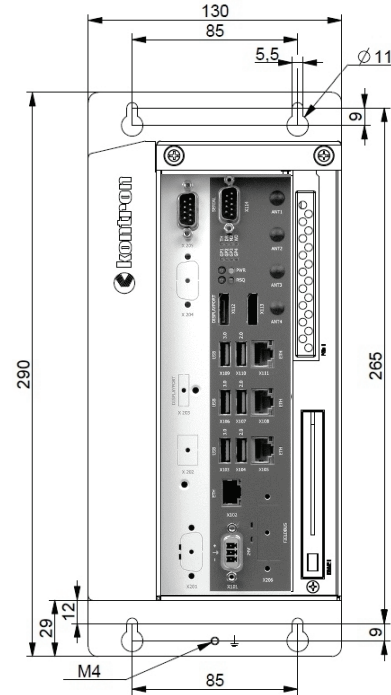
Dimensions: detail key hole (KBox C-104-TGL-1)
